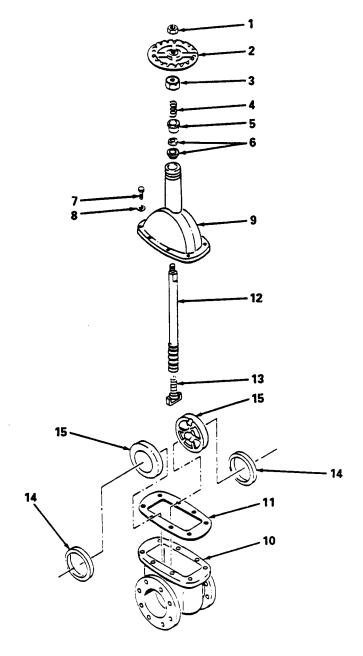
Gate Valve Assembly, Repair (Models ADC-1200 and 1641).
